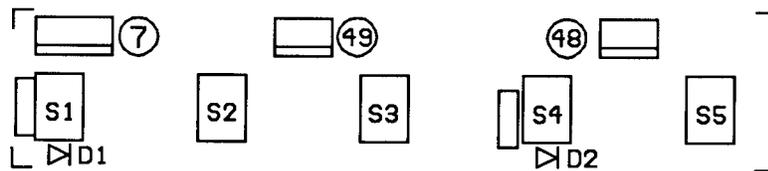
SWITCH BOARD COMPONENT LAYOUT (81603)
